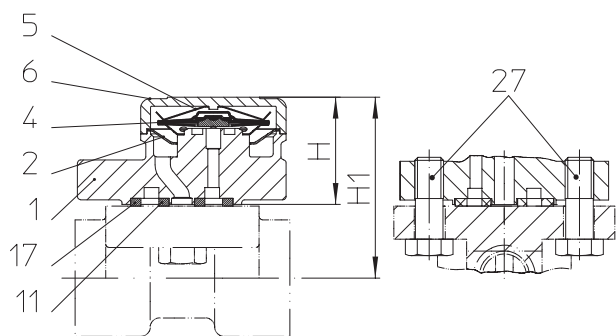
Universal-Flange with 2 x 3/8" UNC-Thread
